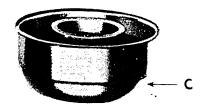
ENGINE FRONT AND REAR MOUNTING
